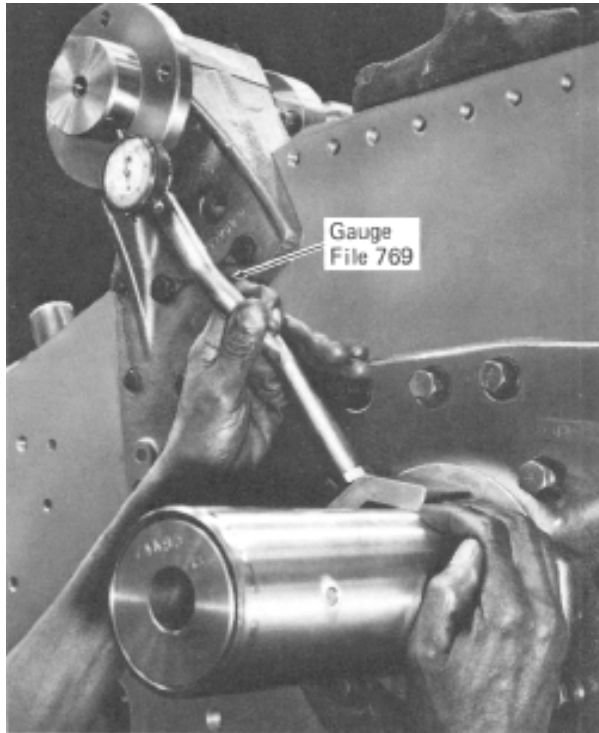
Idler Gear Stubshaft Bracket Alignment
